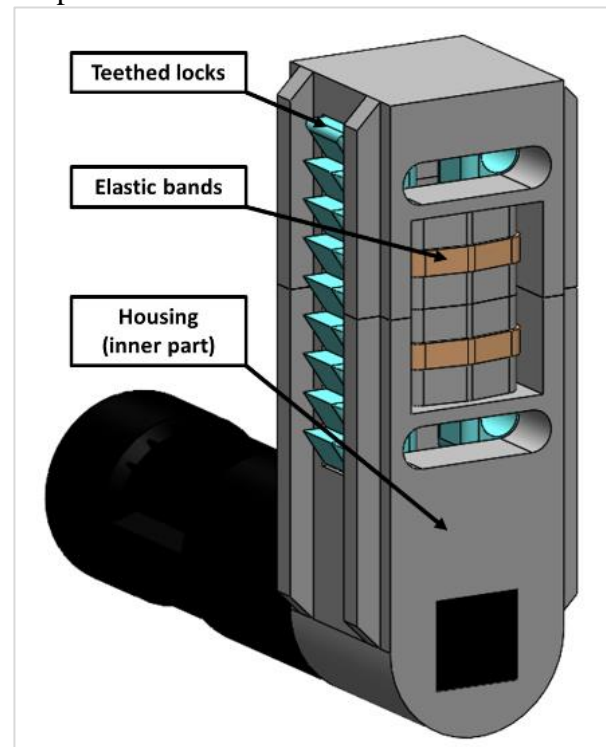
Assembly of the Inner Part of the Telescopic Adjustment
